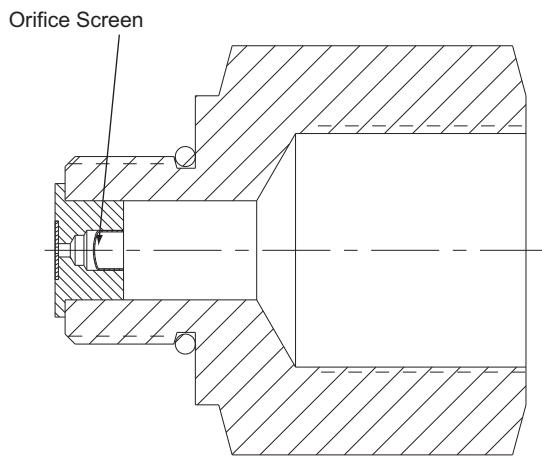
Compressor Inlet Bearing Oil Orifice
